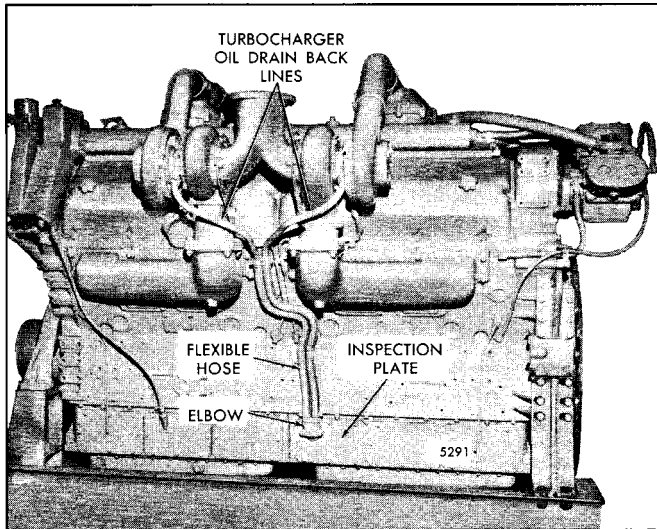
Turbocharger Oil Drain and Oil Supply Line Connections (Former Engines)
